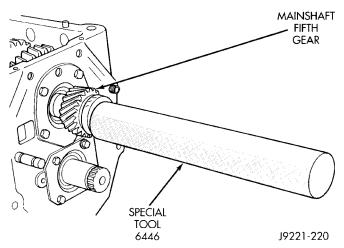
Installing Fifth Gear Onto Mainshaft
